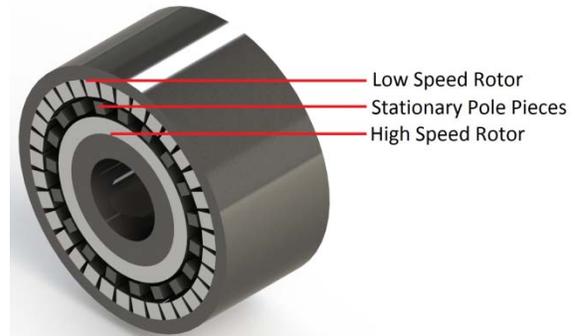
A rendering of the magnetic gear topology used in the USC thruster. 4 magnets form the High Speed rotor and 34 magnets form the Low Speed rotor, resulting in a 1:8.5 gear reduction. 19 pole pieces provide flux harmony.
